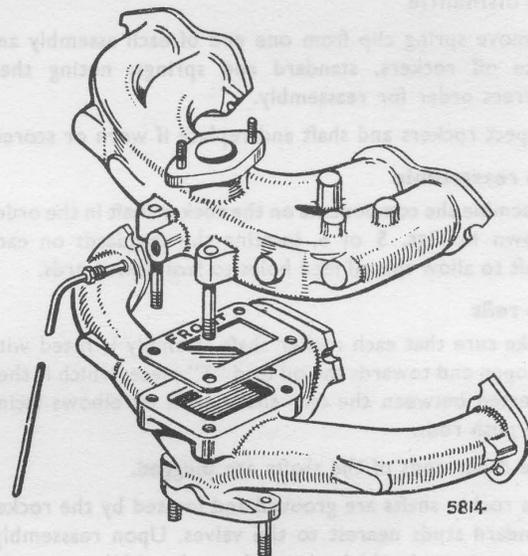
Inlet and exhaust manifolds—cast-iron cylinder heads.
